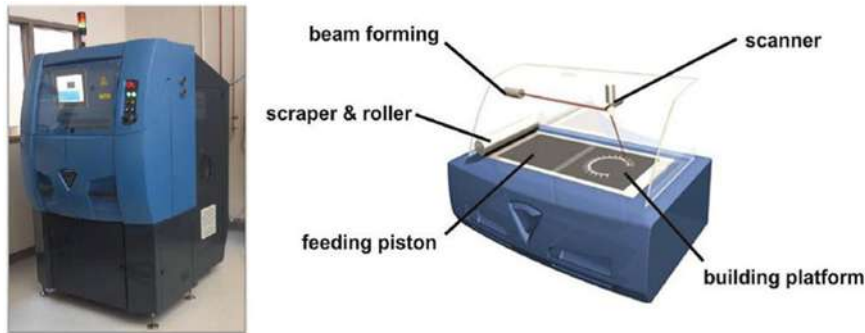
The 3D Systems PXM SLM machine that was used for fabricating the NiTi parts.
